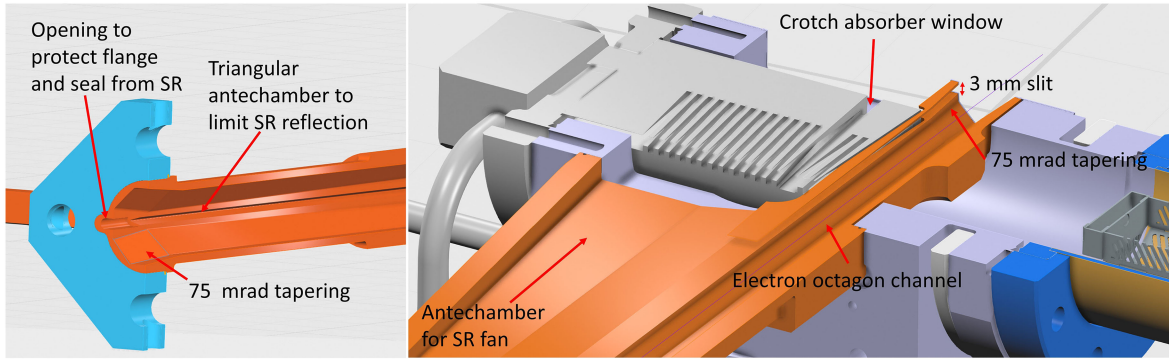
Cut view of a CSD chamber at its flange extremity showing the inner geometry used to avoid direct SR on the gasket seals and to limit reflection (left drawing) and cut view of the crotch absorber installed in the CBN pump block (right drawing).
